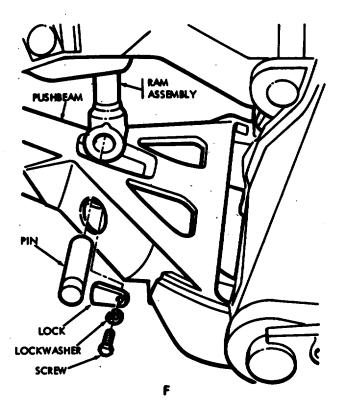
Removal or installation of cylinder assembly (sheet 2 of 2).
